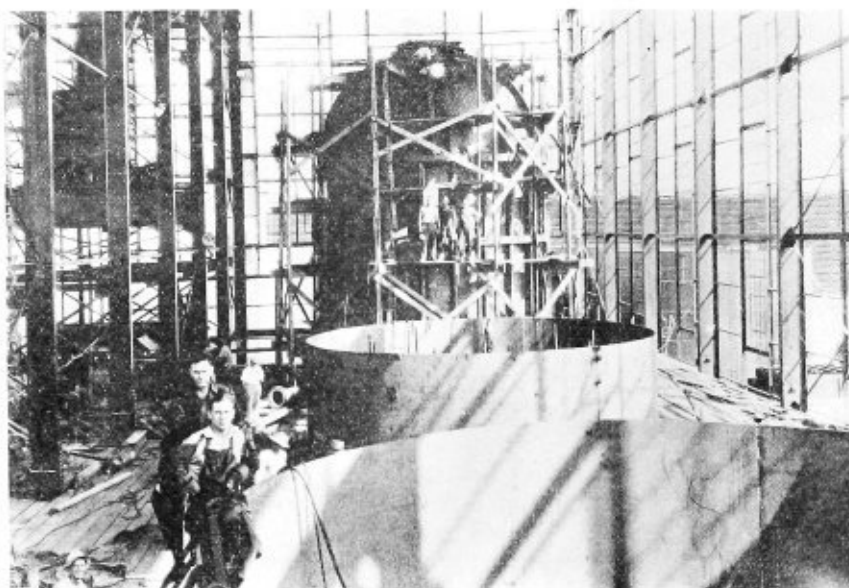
View showing third evaporator assembled and being welded. The lower sheets are set on the first and second evaporators
